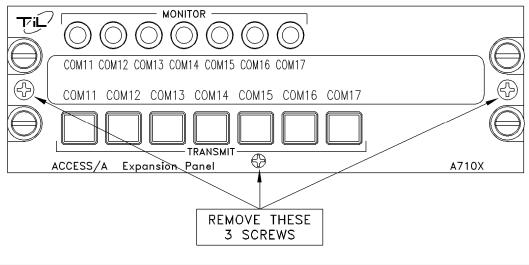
REMOVING THE ENTIRE OVERLAY ASSEMBLY
